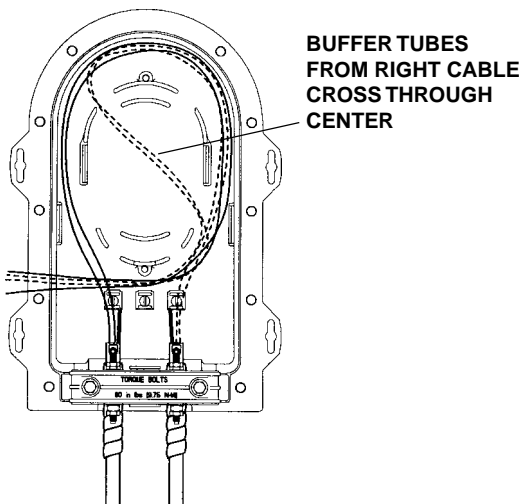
ROUTING BUFFER TUBES IN STORAGE AREA
